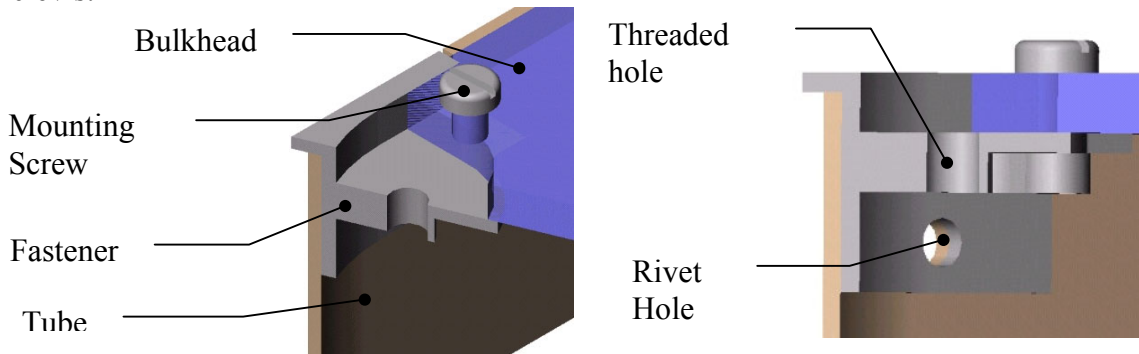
Example of a bracket mounting, (here an intersatellite bracket). Section view through a corner of the spacecraft showing a bracket fixed on the tube and the bulkhead mounted on the top of it (shaped to accommodate the spring and alignment device).
